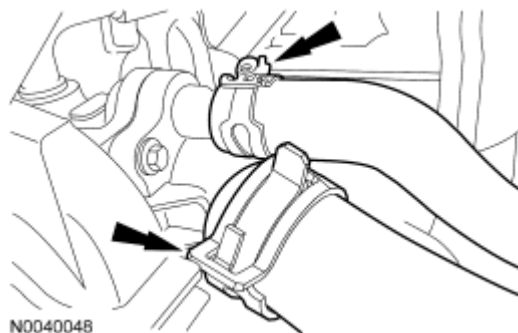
Locating Lower Radiator And Heater Hoses From Thermostat Housing
